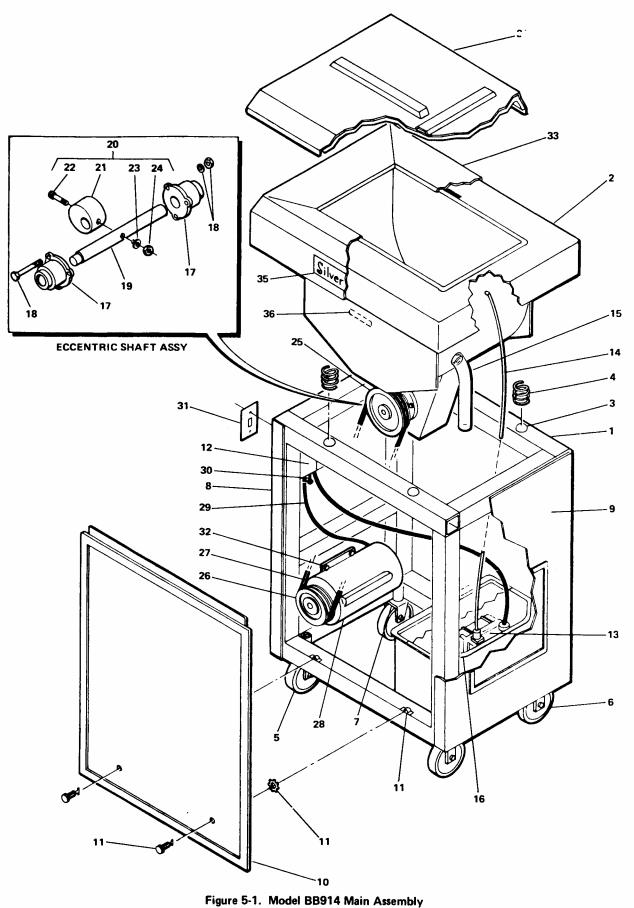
MODEL BB914 MAIN ASSEMBLY
